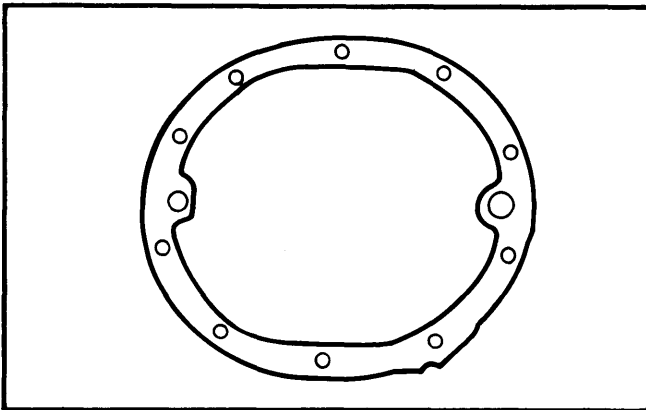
8 1/2", 8 7/8" and 9 1/2" Ring Gear Housing Cover Gasket for Axle Identification Purposes
